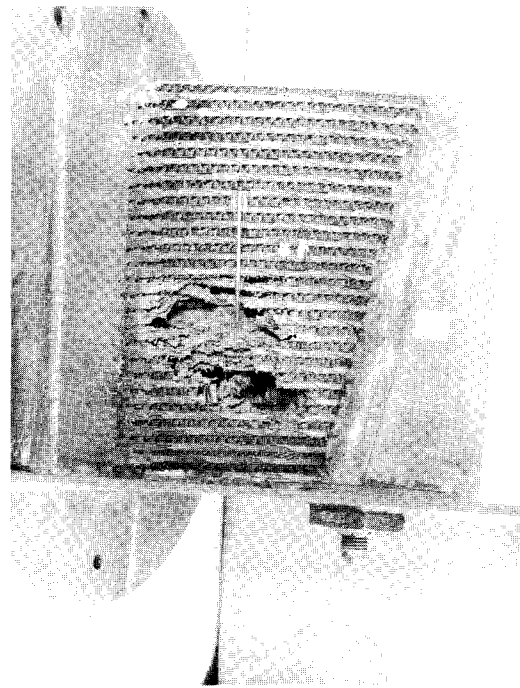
Typical front burn-out damage with diesel fuel injection (68-0695)
